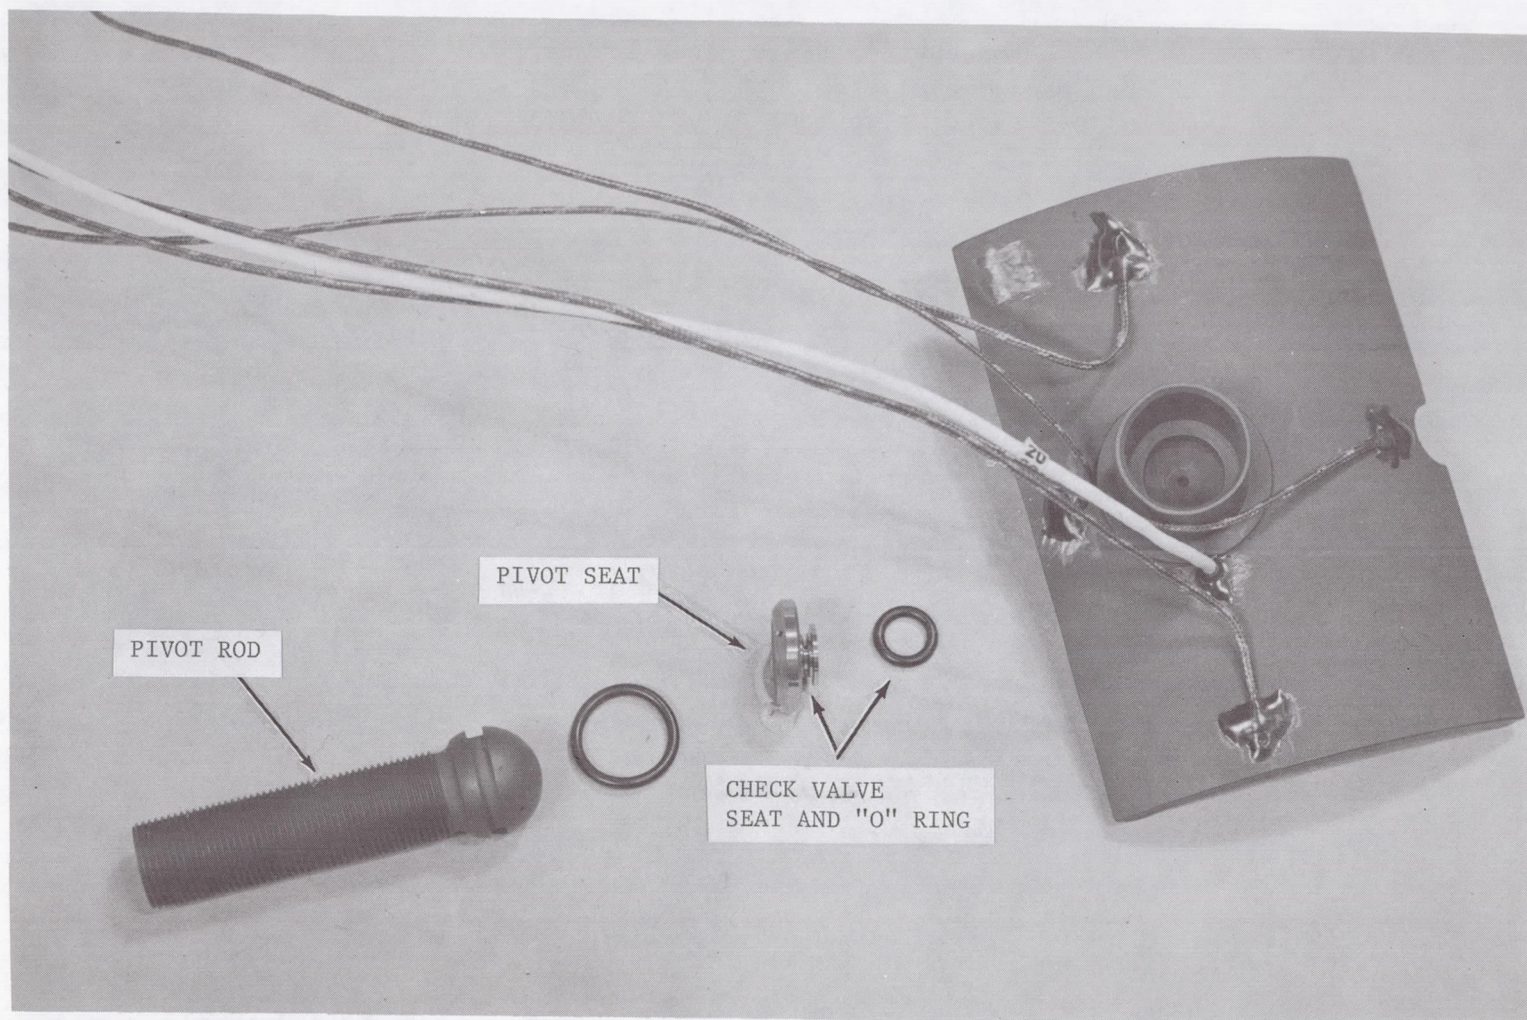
View of a Fully Instrumented Bearing Pad With Pivot Rod, Pivot Seat and Check Valve Parts
